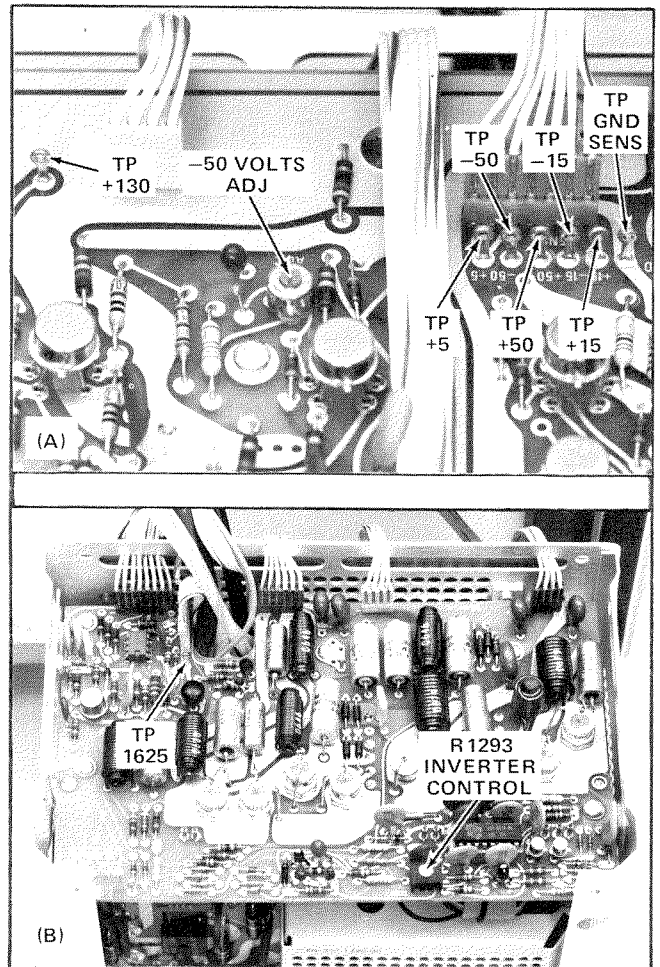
(A) Location of low-voltage power supply test points and -50 Volts adjustment on Regulator board, (B) Location of Inverter Control adjustment and TP 1625 on Cap-Rectifier board.
